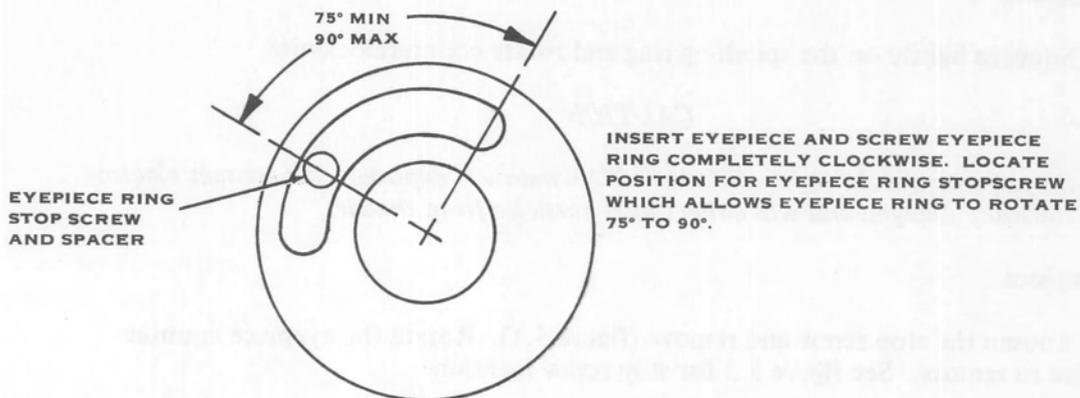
LOCATION OF EYEPIECE RING STOP SCREW
